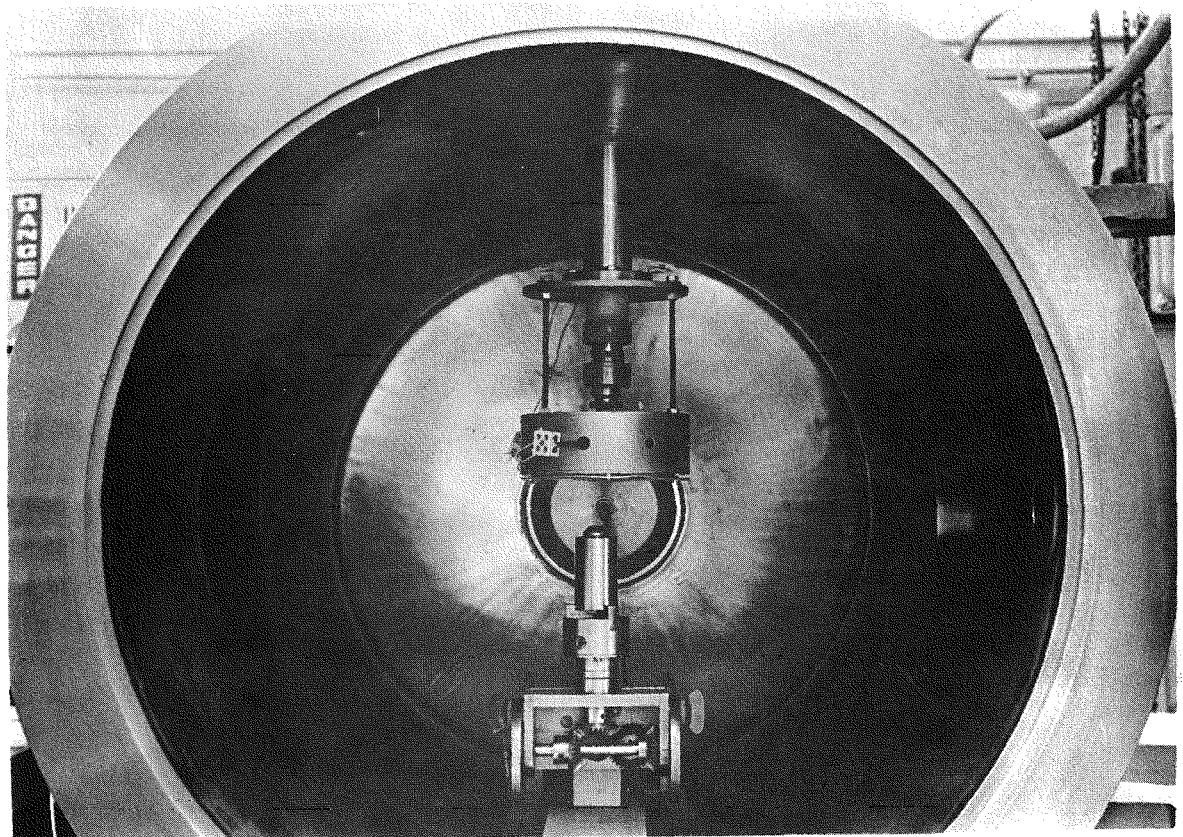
THE ELECTRON GUN AND CHUCK ASSEMBLY
